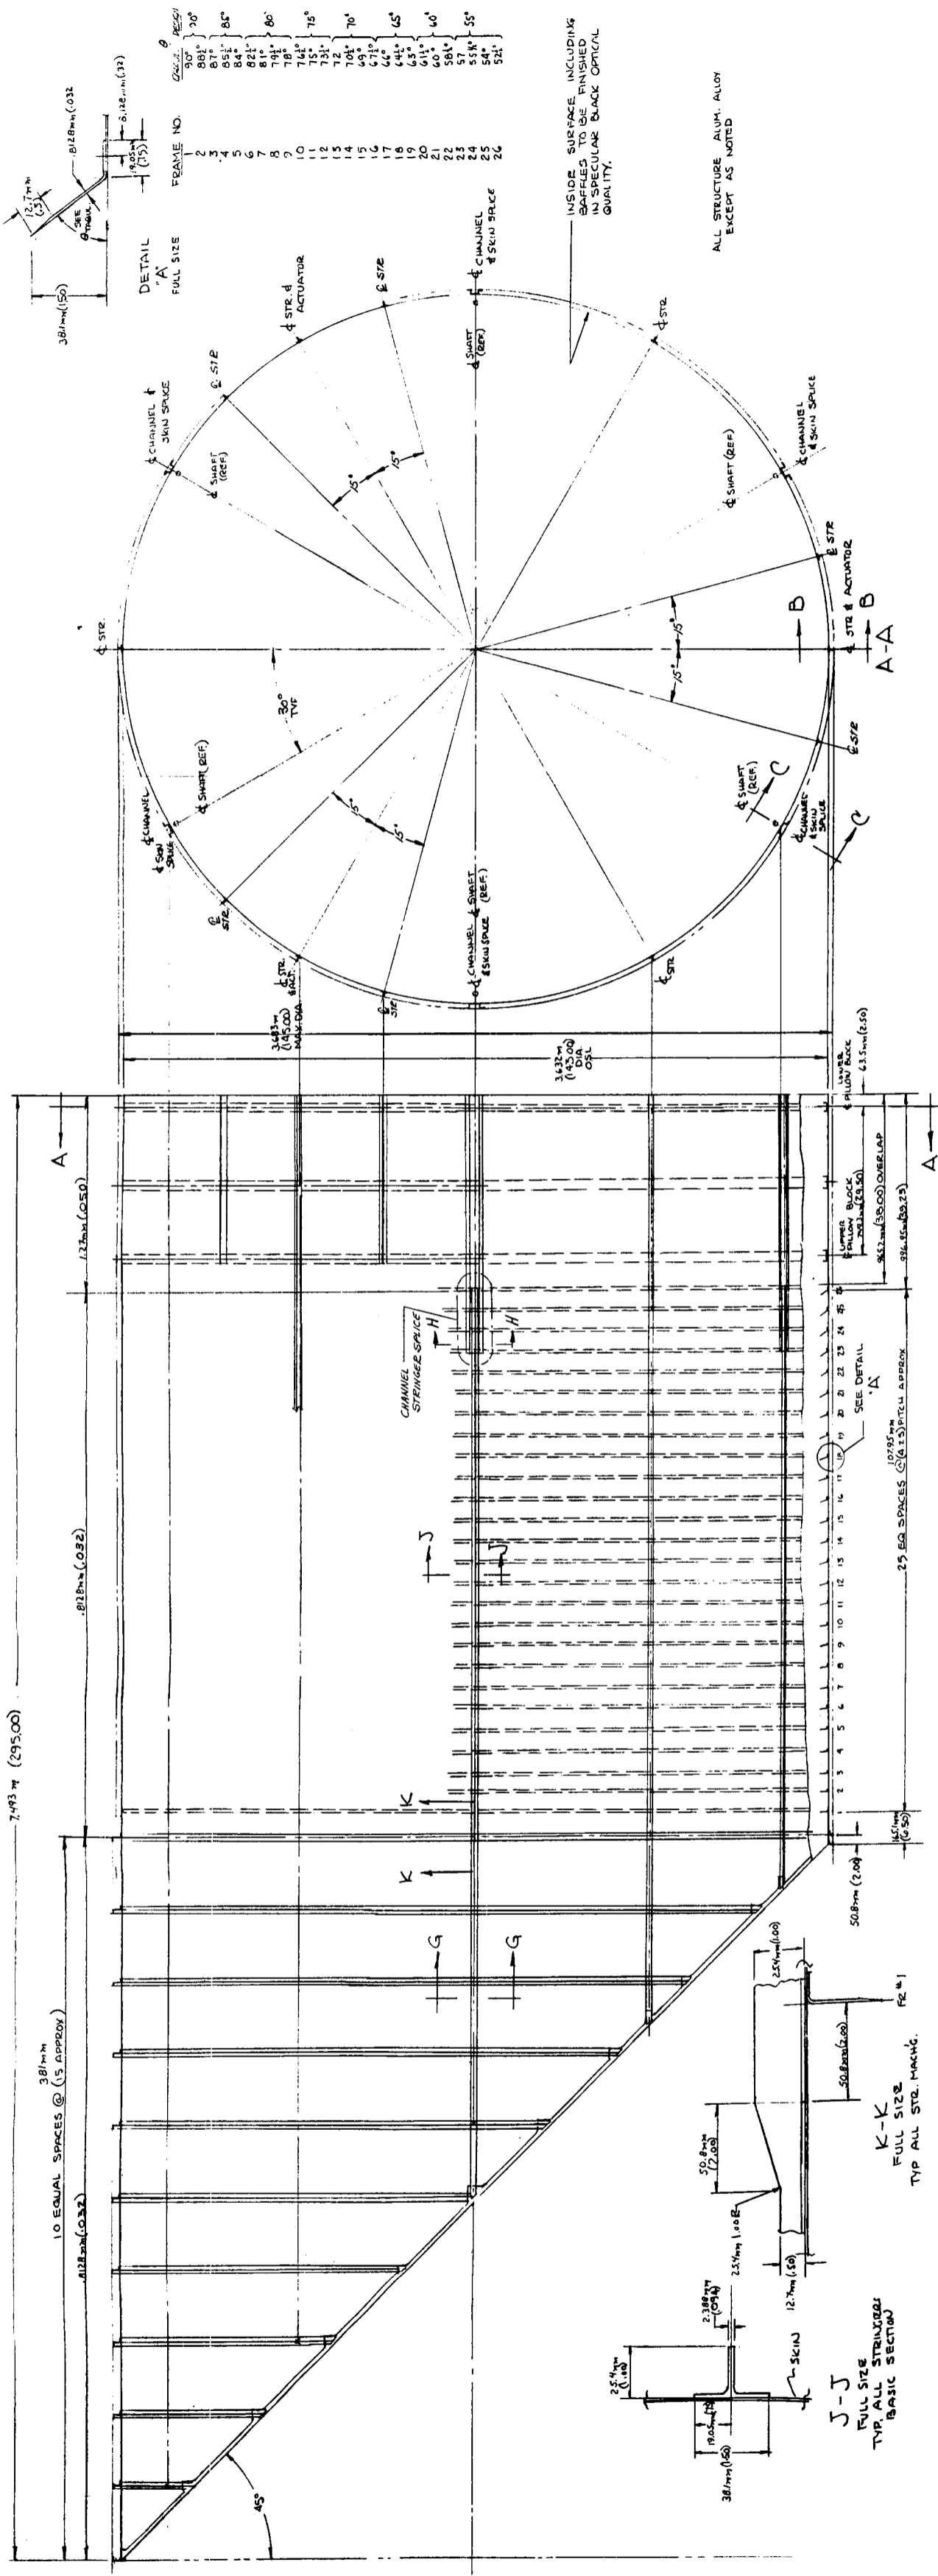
Sun shield assembly (dwg. no. SK-LST-018) (Cont.)
